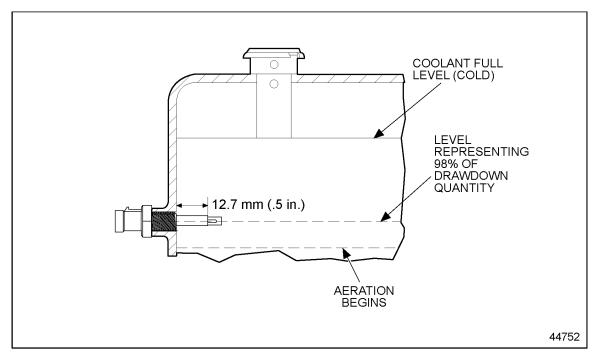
Engine Coolant Level Sensor Mounted in Radiator Top Tank
